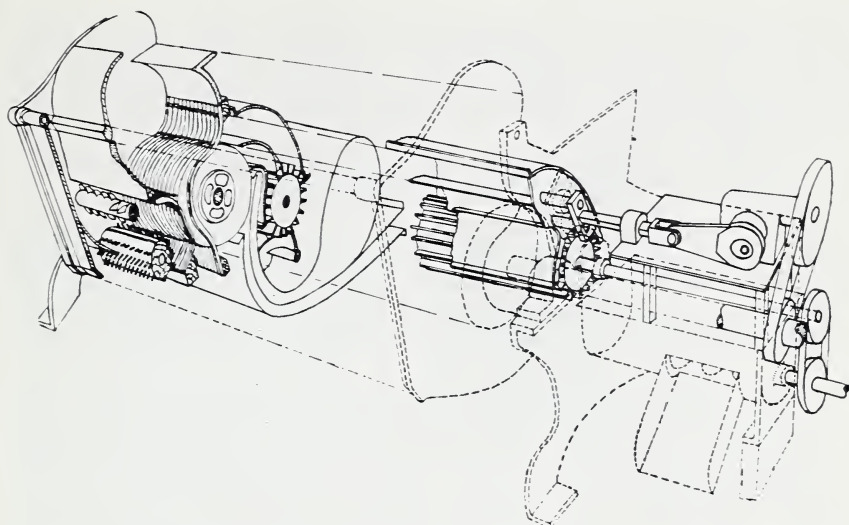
An isometric view of a gin stand equipped with a 2-bar reciprocator and showing the drive mechanism.
